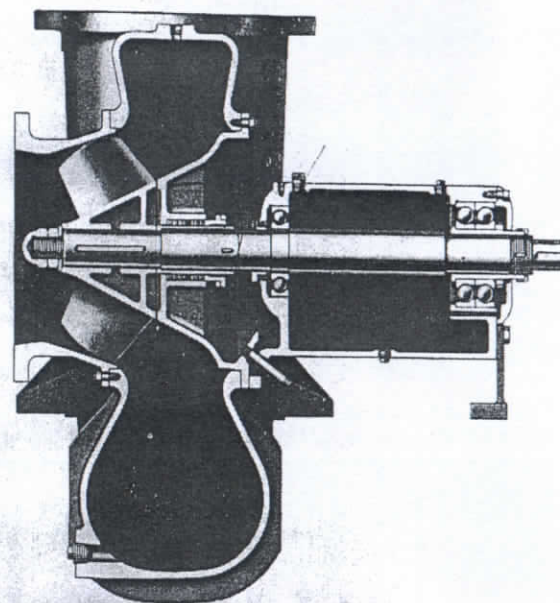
Horizontal volute propeller pump (Ingersoll-Rand).
